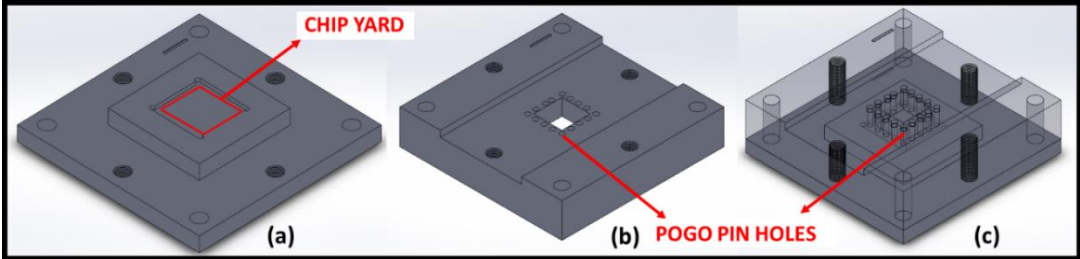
Illustration showing (a) the base module, (b) the top module and (c) the assembly of the 8-channel chip holder.
